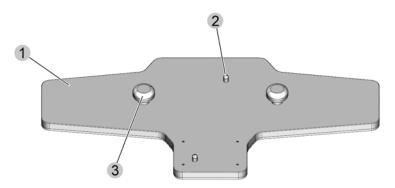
Contact plate for 1 pellet station at position 5 (dosing unit 2)
